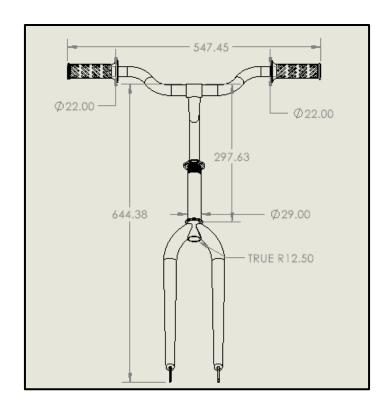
Fork and handle dimensions drawing. All dimensions in mm.
